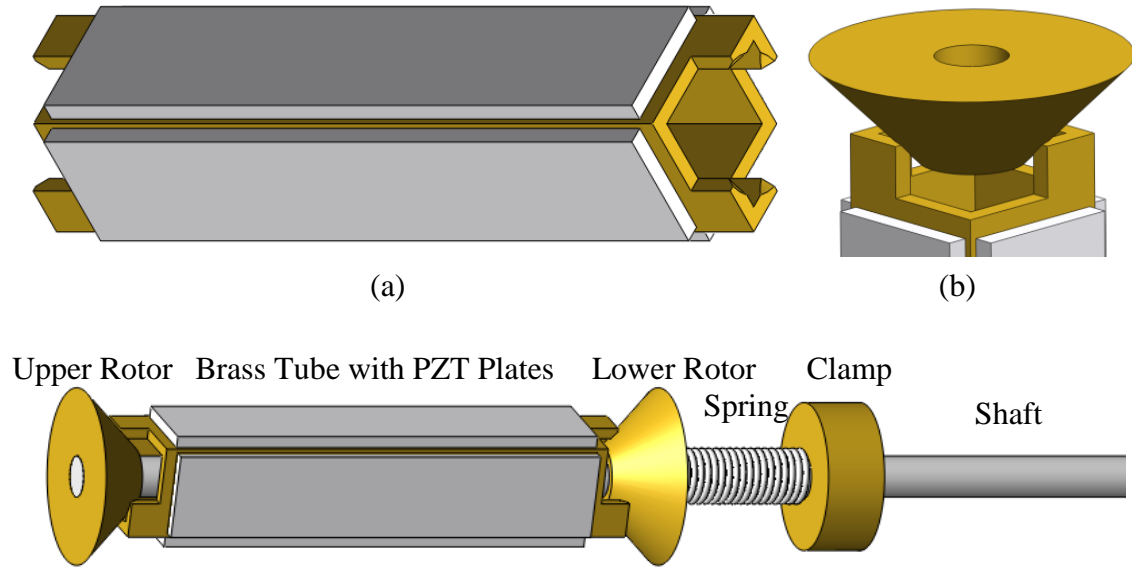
Standing wave brass-PZT square tubular ultrasonic motor. (a) Stator. (b) Rotor. (c) The motor assembly.
